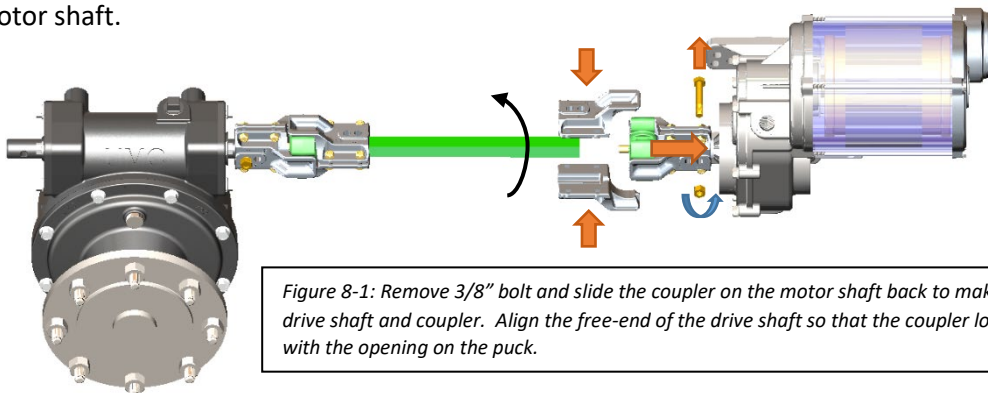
Remove 3/8" bolt and slide the coupler on the motor shaft back to make room for the drive shaft and coupler. Align the free-end of the drive shaft so that the coupler load arm is in line with the opening on the puck.
